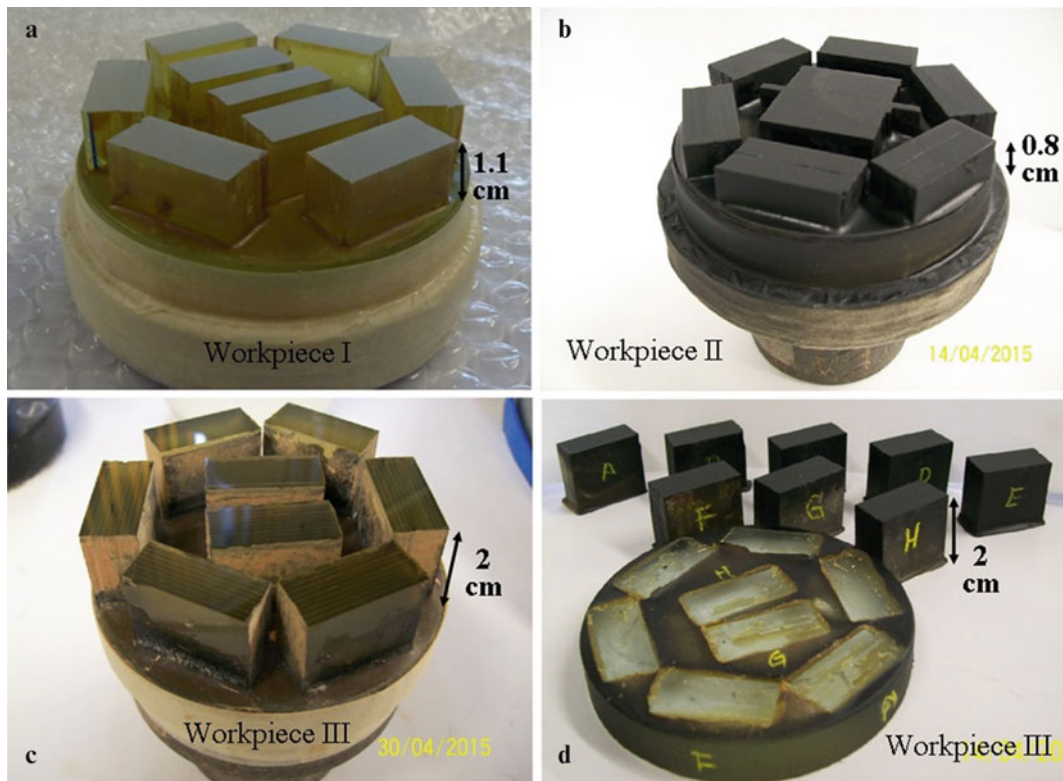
(a) Workpiece I, after grinding. (b) Workpiece II, with protective coating. (c) Workpiece III after polishing. (d) Individual blocks in of workpiece III
